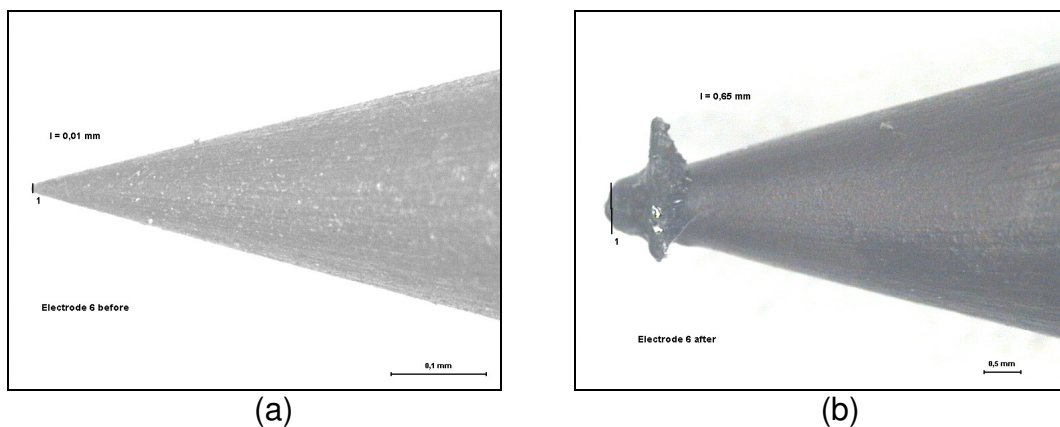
Angle of Electrode 6 used for experiment number 6: (a) before welding $\leq 32.66^\circ$; (b) after welding $\leq 42.43^\circ$.
